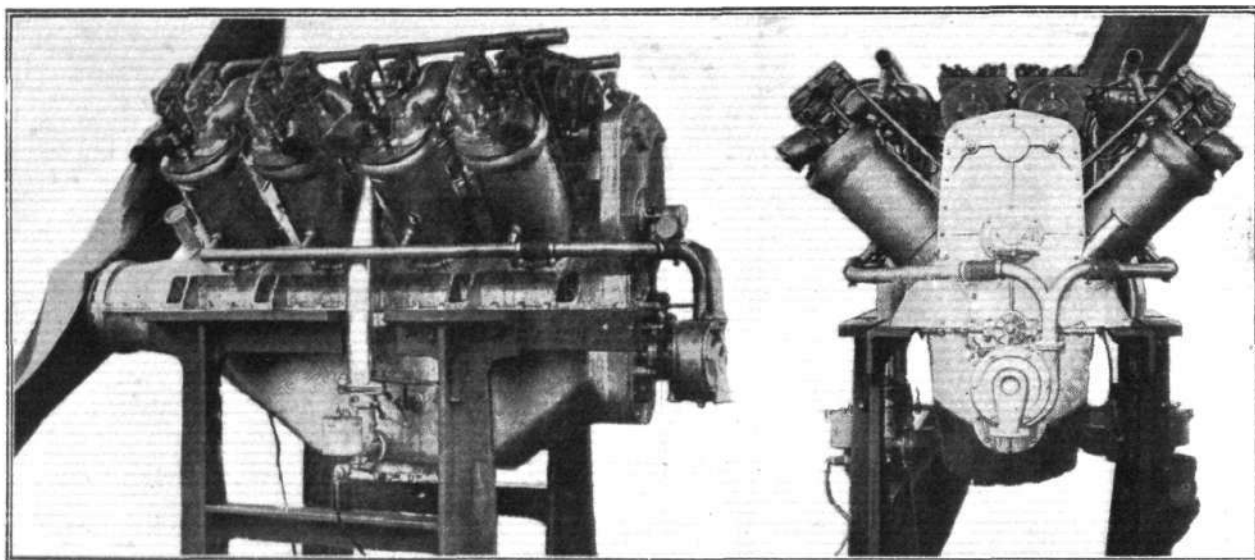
The latest 160 h.p., model V2, Curtiss motor, side and end views.
